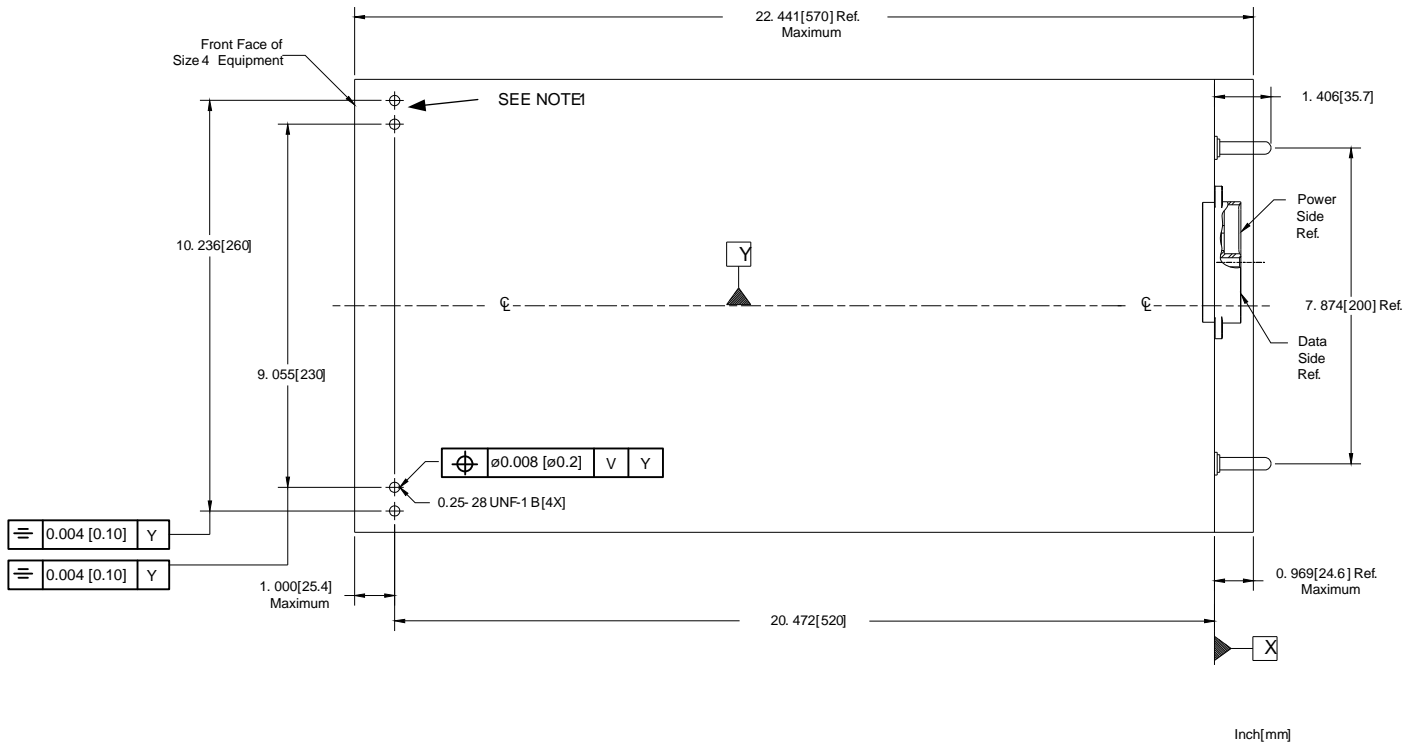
B – GAIN Size 4 Equipment Standard Dimensions Drawing – Side View
